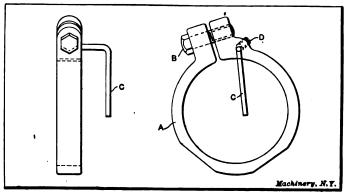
Ejector used in Connection with the Shaving-tool Holder shown in Fig. 81
